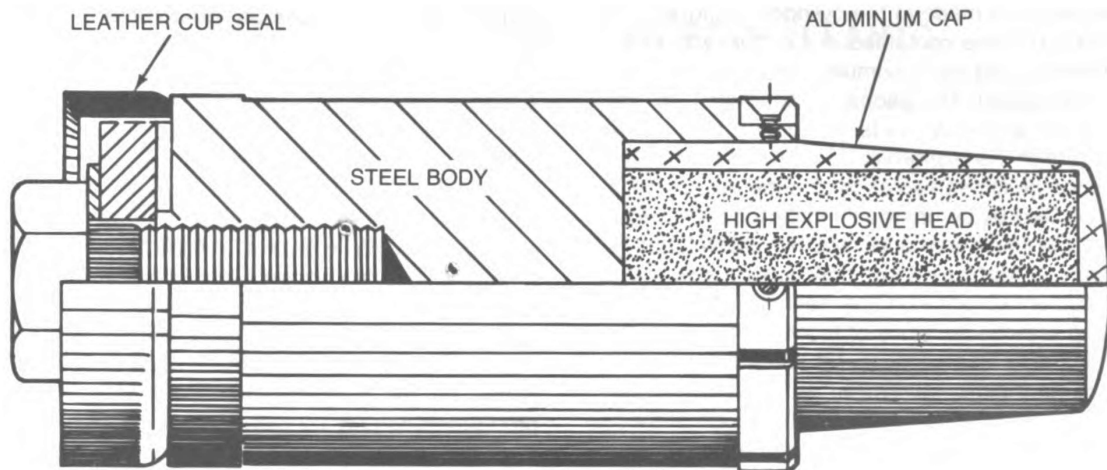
Scaled drawing of the SUSAN projectile. The high explosive head is 4 in. long and 2 in. in diameter (.102 m  $\times$  0.051 m).
